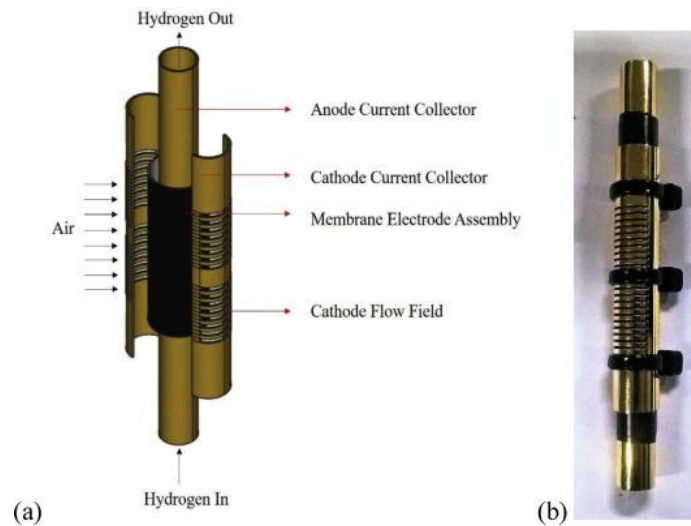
A cylindrical PEFC: (a) an exploded view of the fuel cell and (b) a picture of assembled fuel cell.
